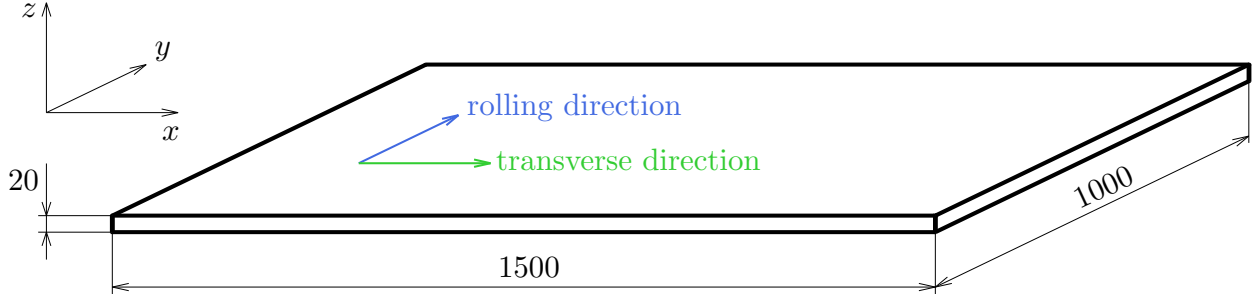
Detailed drawing of supplied plate of aluminium alloy (dimensions in mm).
